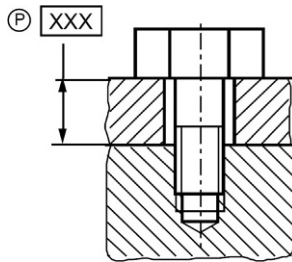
Projected tolerance zone for threaded hole and head screw
